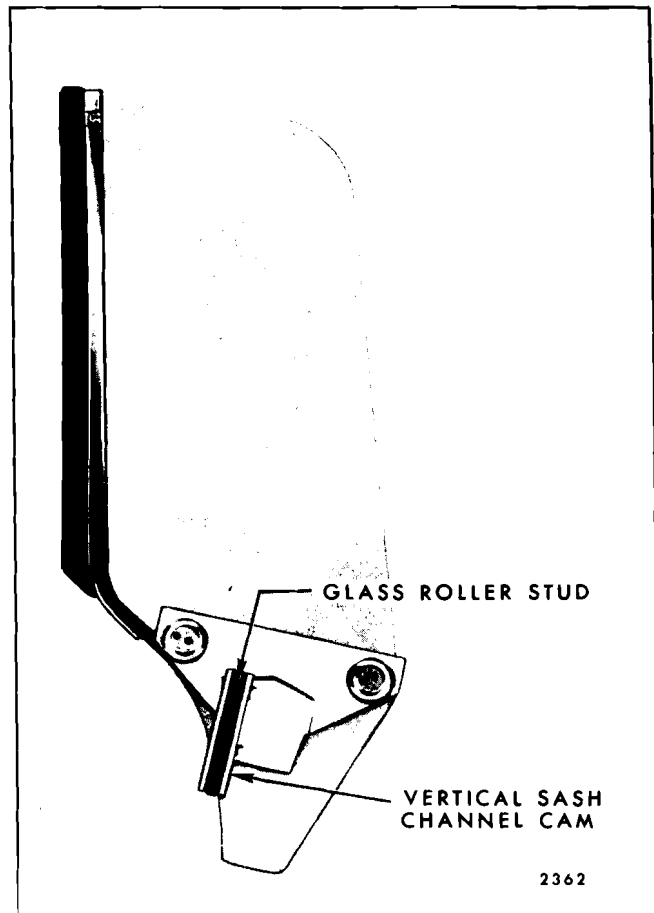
Rear Quarter Window Assembly - "E-47" Styles
